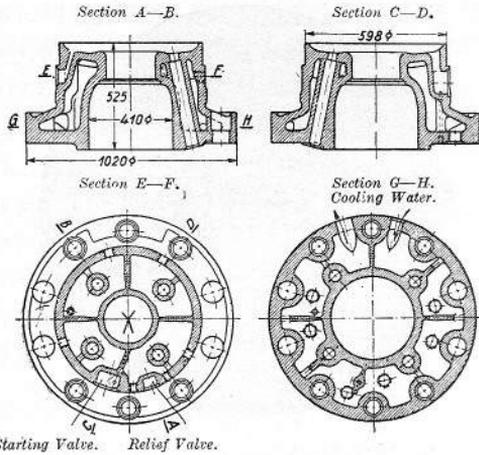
Cast-Iron Cover for the Bottom End of a Double-Acting Two-stroke Cycle Diesel Engine.
